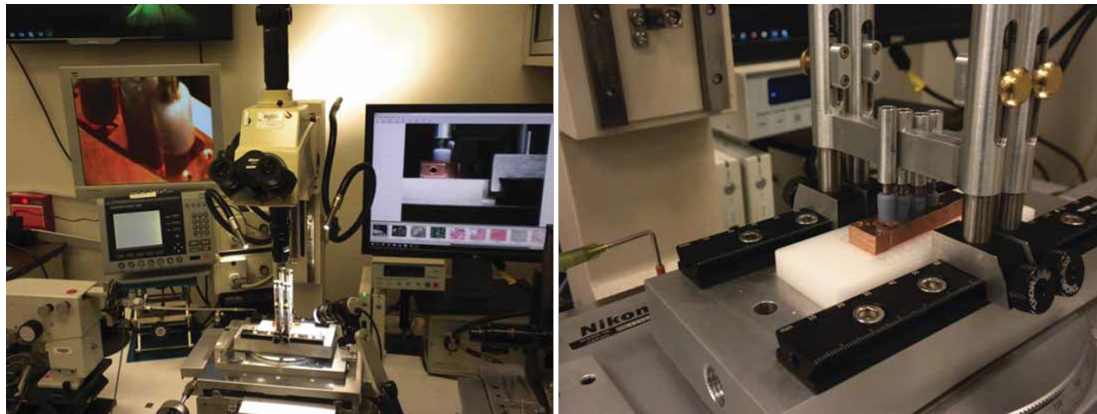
Image of a planar DMP target being assembled using the multi-press. The press is being used on the custom assembly station which allows the use of cameras for magnified viewing and precise positioning of the stacks to avoid shifting (L). An enlarged image of a planar DMP target being assembled using the multi-press (R).
